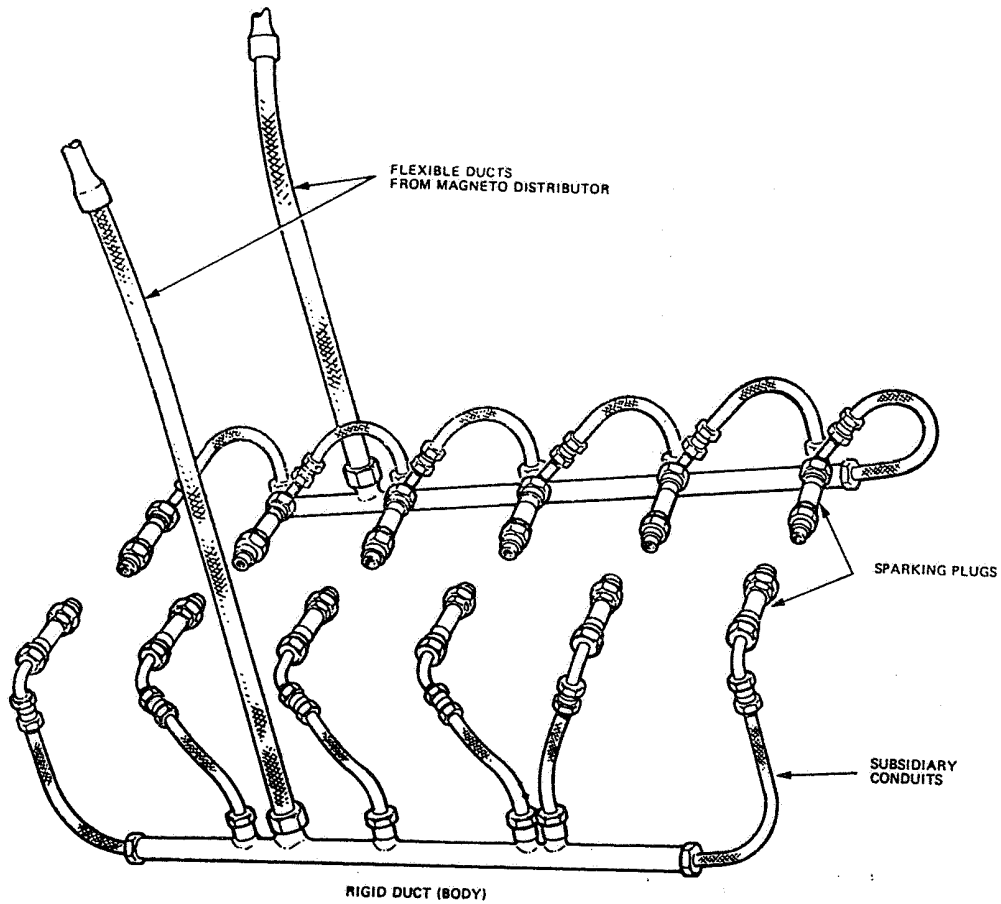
IGNITION HARNESS FOR A TYPICAL SIX CYLINDER, IN-LINE ENGINE
